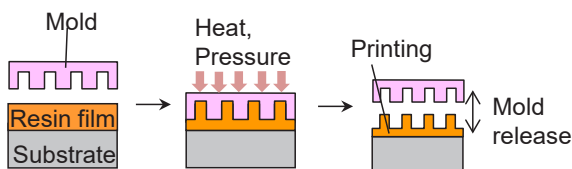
Method for fabricating resin sheet by nanoimprinting.
